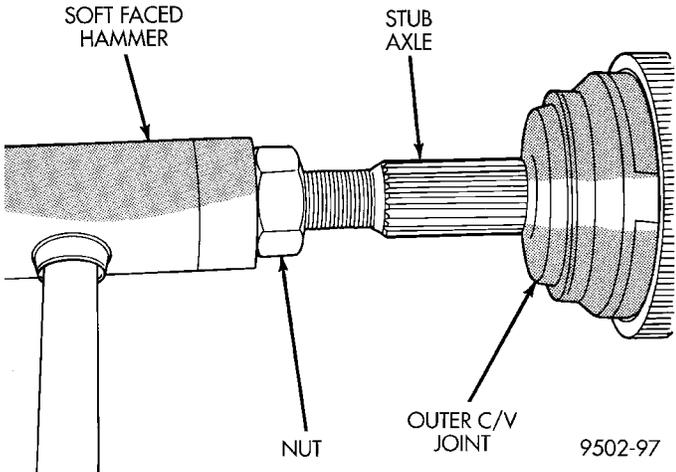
Outer C/V Joint Installation on Interconnecting Shaft
